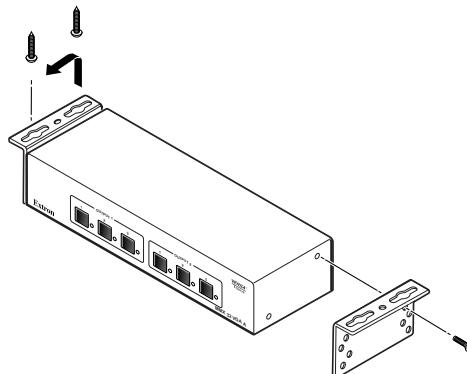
Mounting the MMX 32 VGA A under furniture
